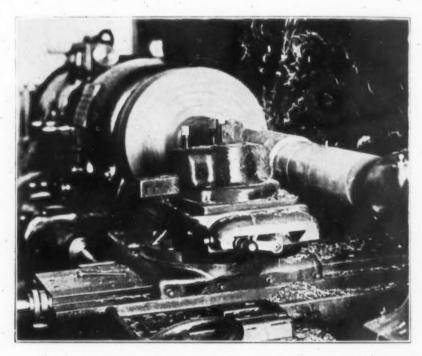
Intermittent Cutting on Lathe Amounting to Over 400 Impacts per Minute on Cutting Edge.
